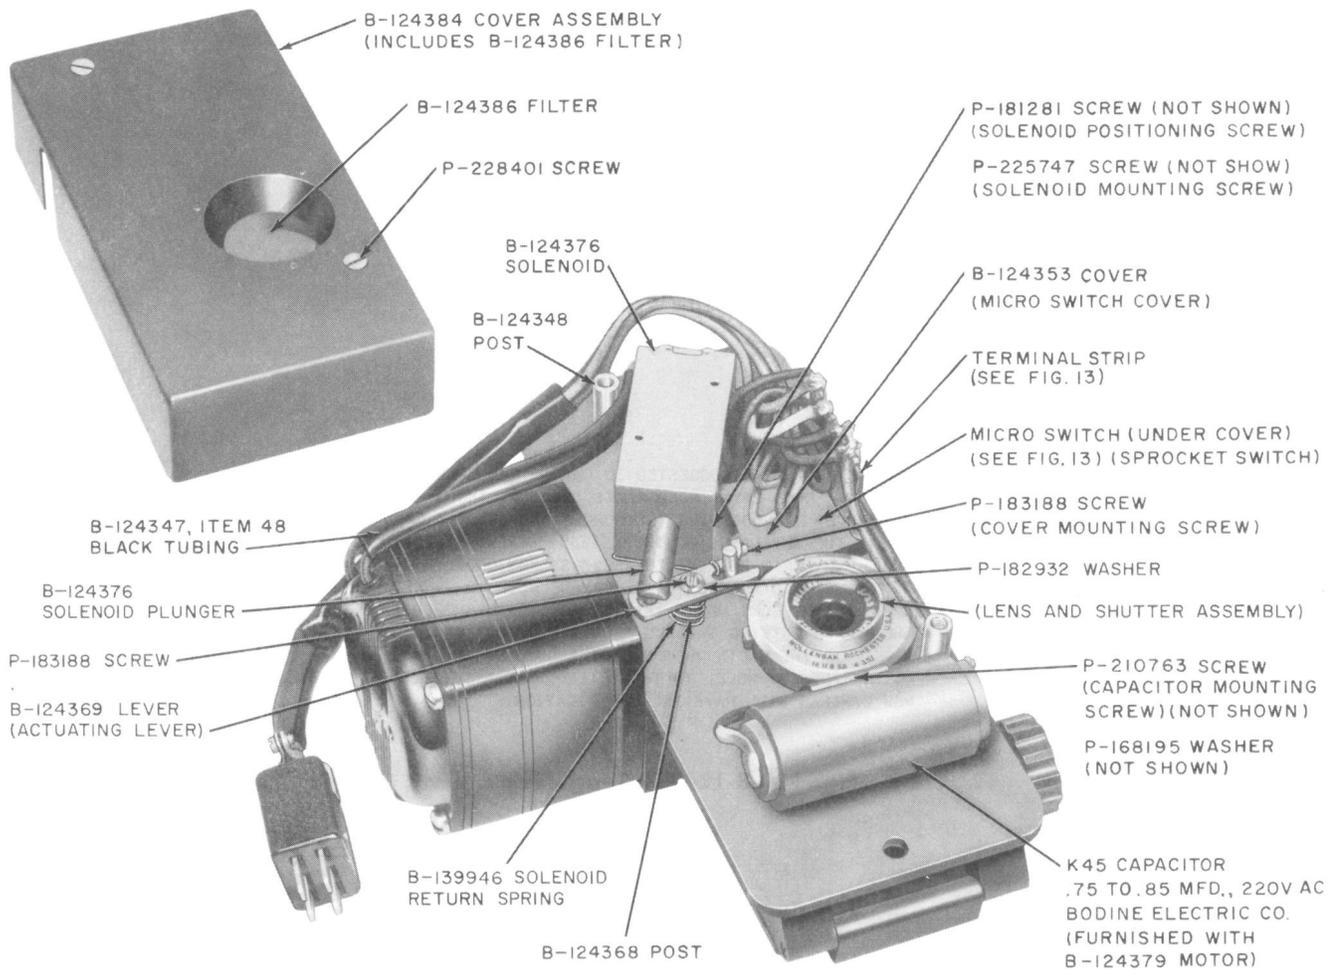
KS-16007 Camera With B-124384 Cover Assembly Removed From Camera
